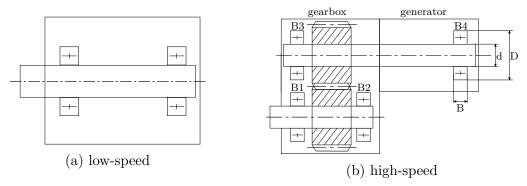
Bearing configuration for low- and high-speed scenarios.
